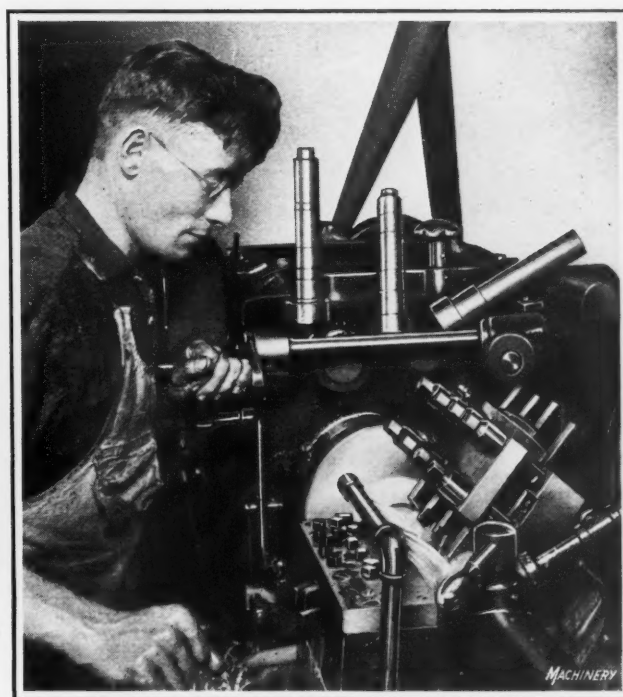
Coolant being supplied copiously on a Machine equipped with Intensive Tooling
